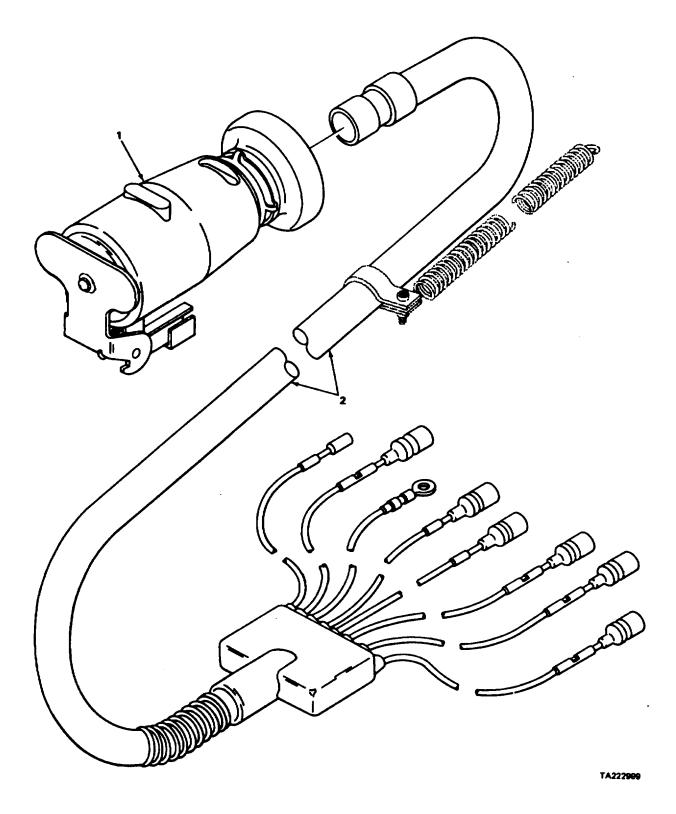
INTERVEHICULAR CABLE ASSEMBLY.
